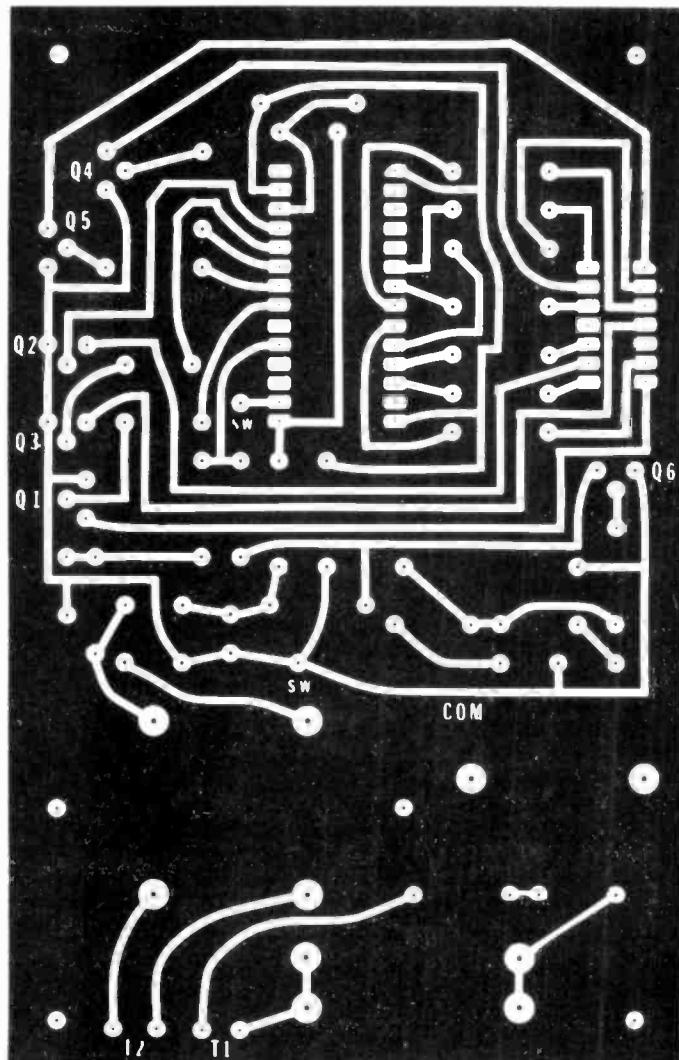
Exact-size foil pattern for a printed-circuit board for the project.
